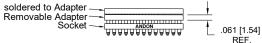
128 Pins Thru-Hole: 12-13-02-128-437T-R27-L14 Surface Mount: 12-13-02-128-319T-R27-L14 Adapter: 12-13-02-128-321-G10-L14 Rollerball<sup>®</sup>: 12-13-02-128-RB339T-R27-L14
